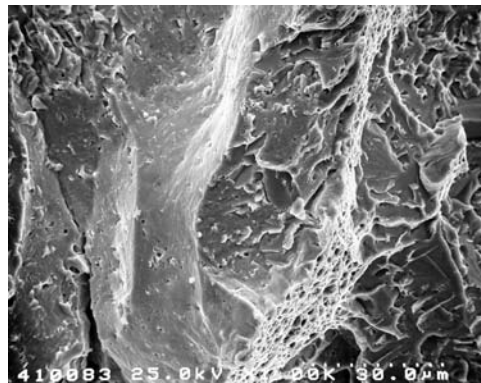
Brittle intergranular and transgranular fracture surface of the stress-relief annealed HSLA weld metal
